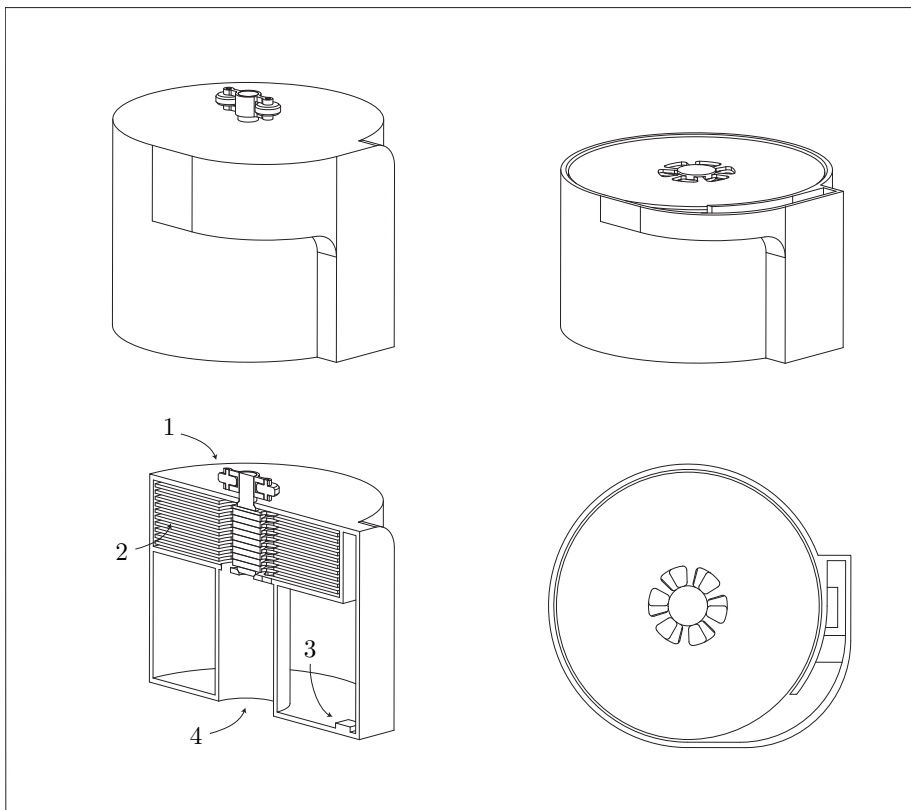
Concept A1B3D3E2G3. Top left: small Tesla turbine engine. Top left: housing cut open. Bottom right: cross section 4: Bottom left: top view of the top left image. 1: crank and wheels 2: disks 3: fuel inlet port 4: exhaust port 5: catalyst material.
